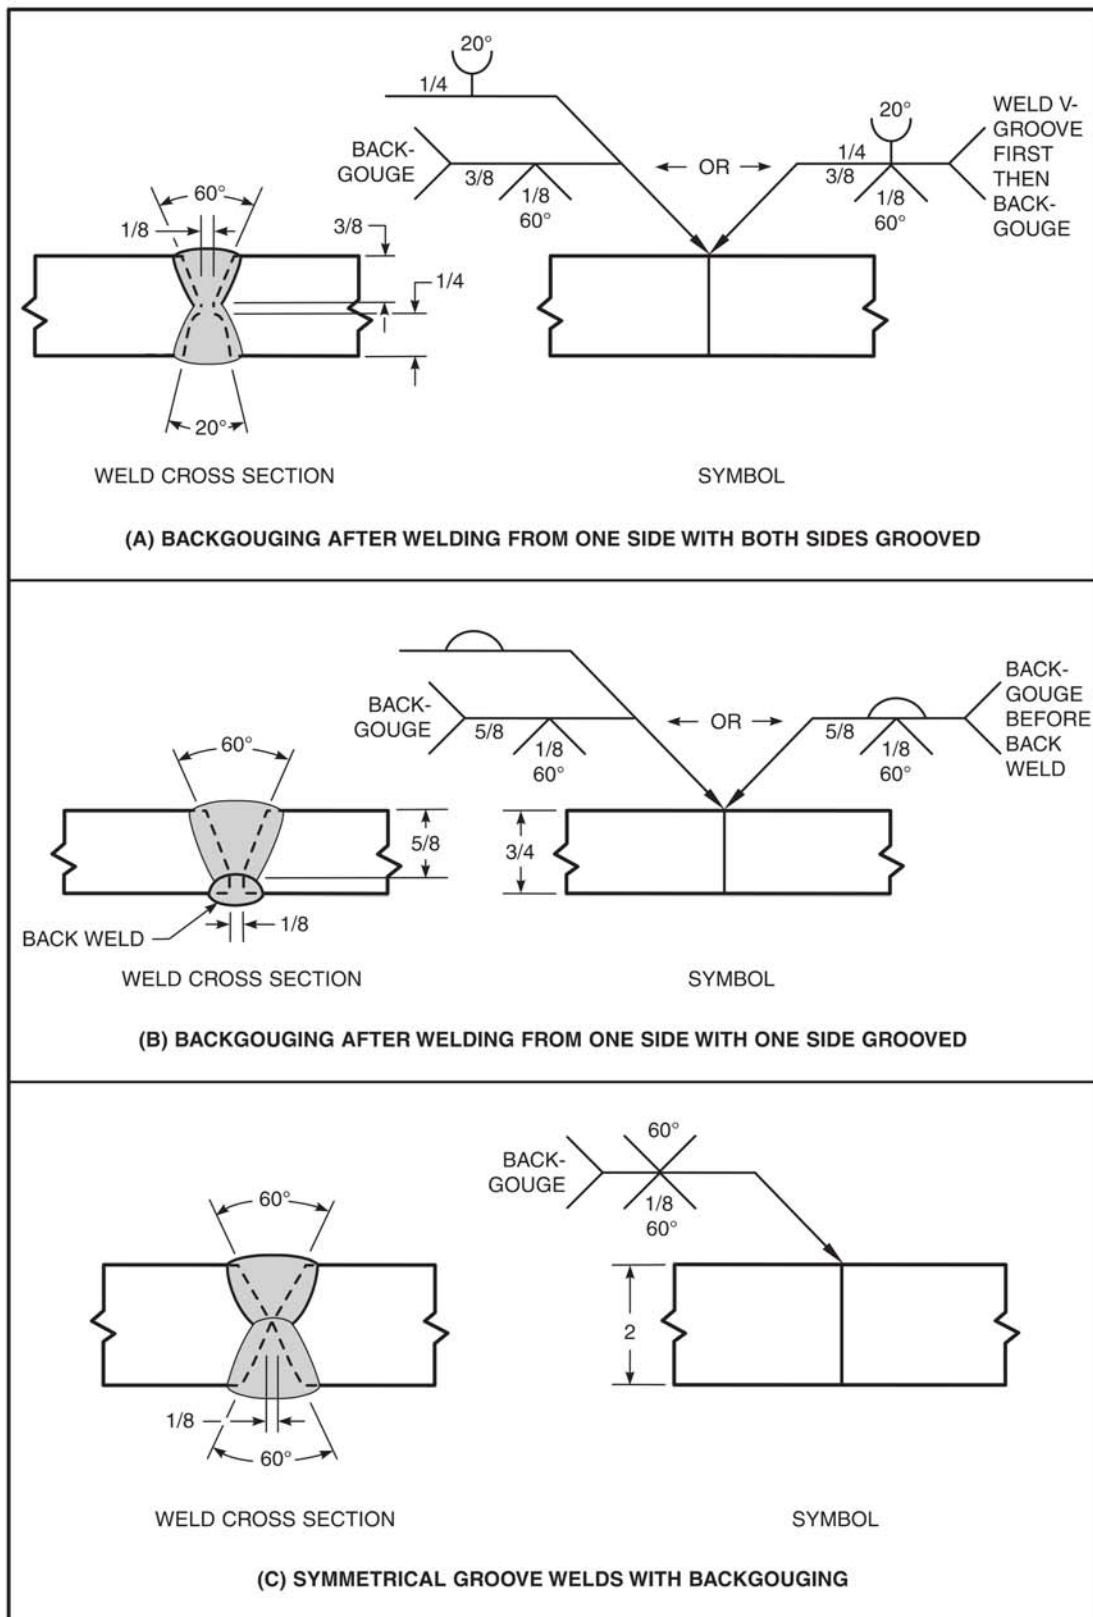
Application of the Symbol for Groove Welds with Backgouging
